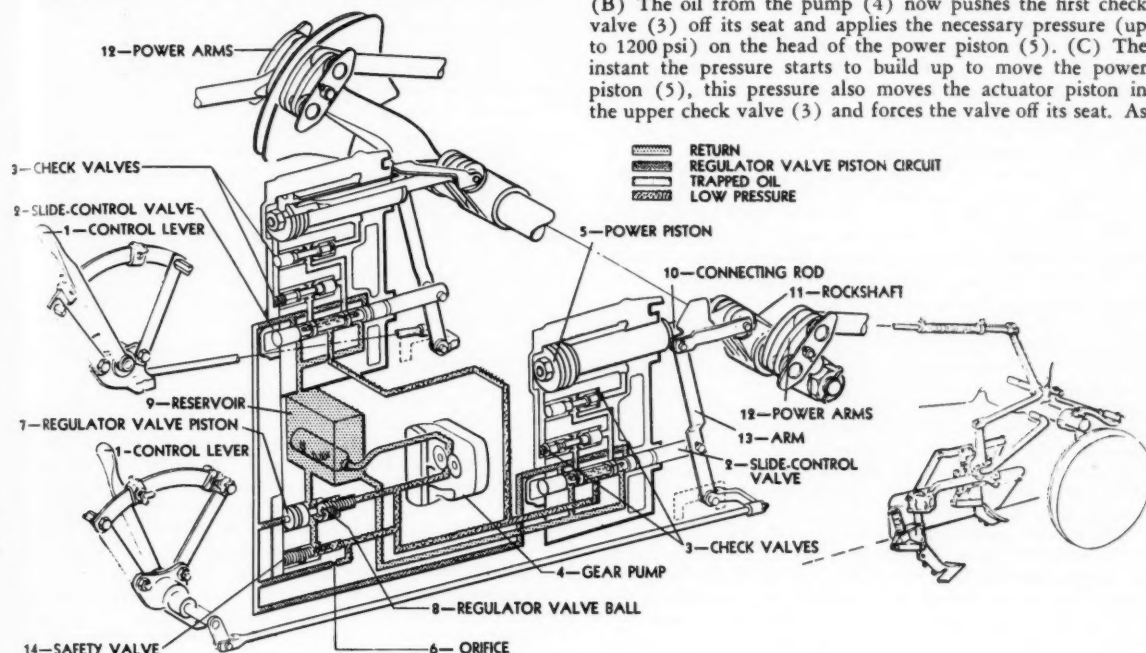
A schematic drawing of the Touch Control unit in the neutral position
